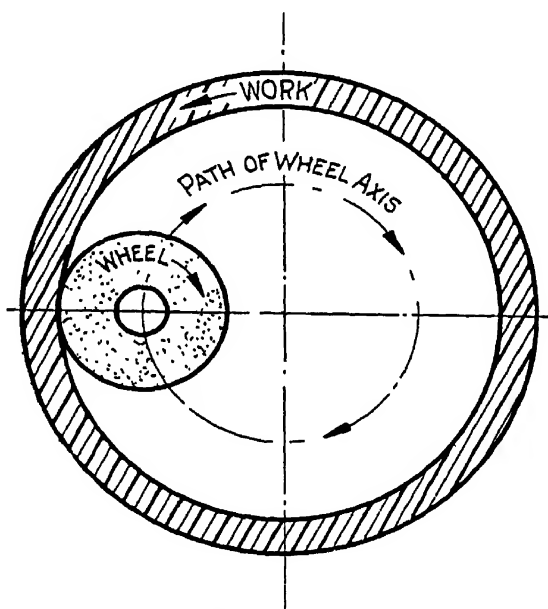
PLANETARY MOVEMENT OF GRINDING WHEEL
